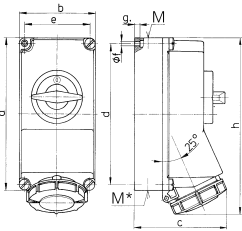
MB 181/620	Amp. Poles	16		32		63
